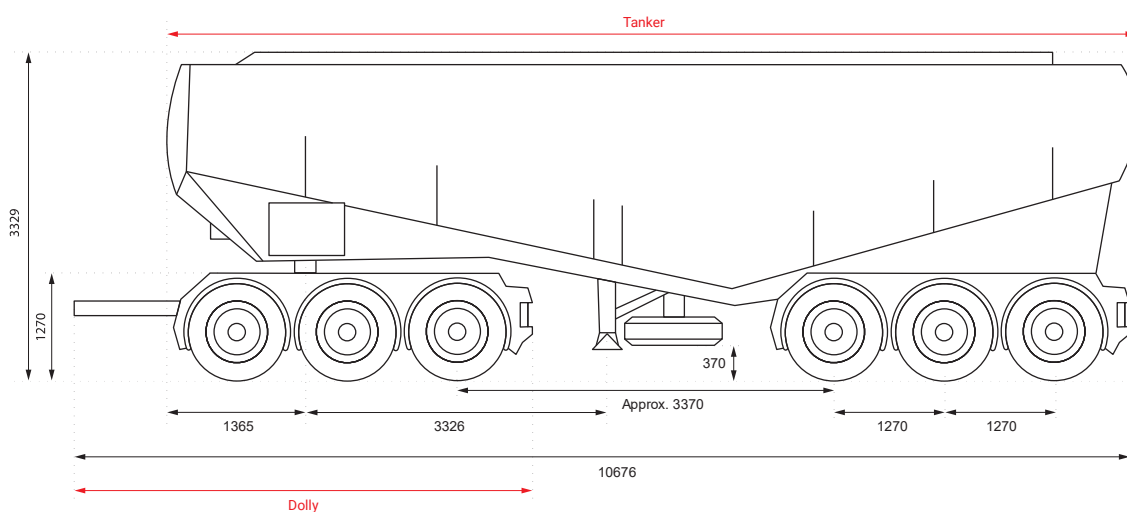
Schematic of tanker trailer and dolly involved in the explosion
